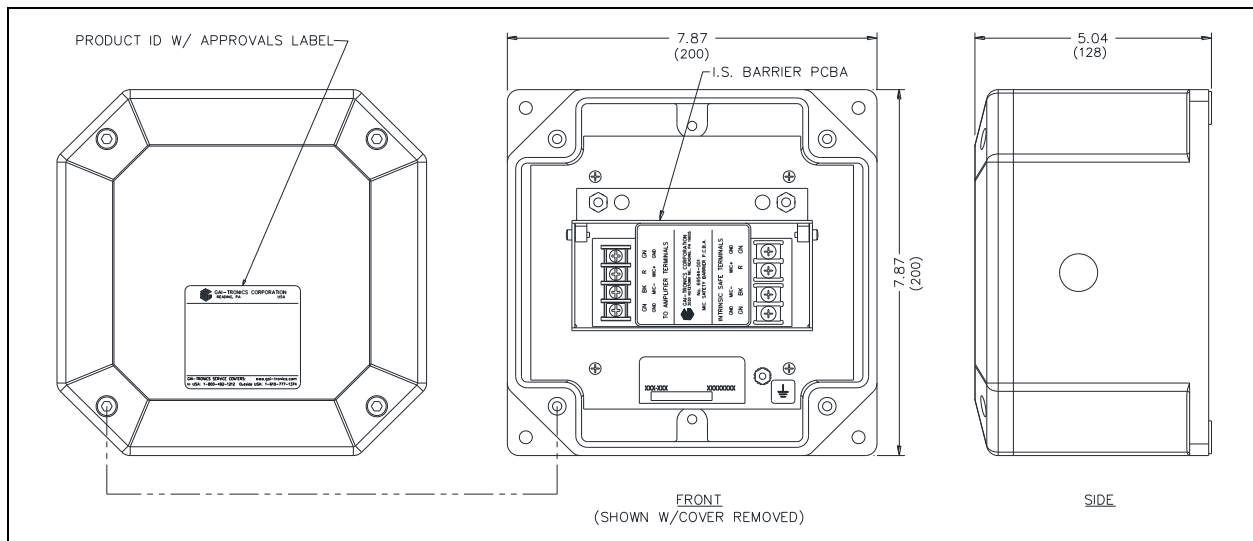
Model 10438-101 Microphone I.S. Barrier Outline Drawing
